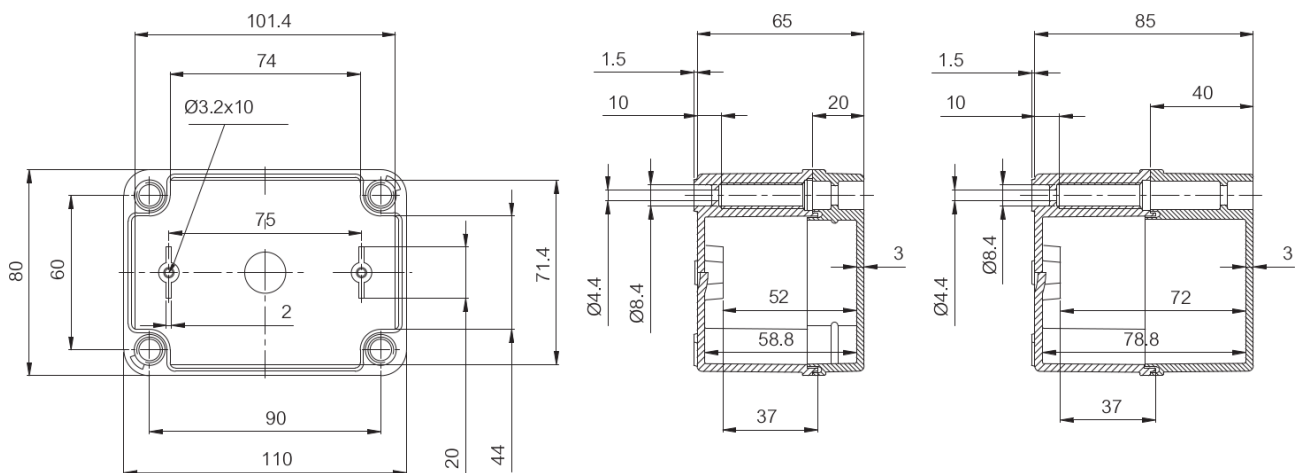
Housing dimensions. Note: Drawing not including air inlet. Dimensions in mm.
